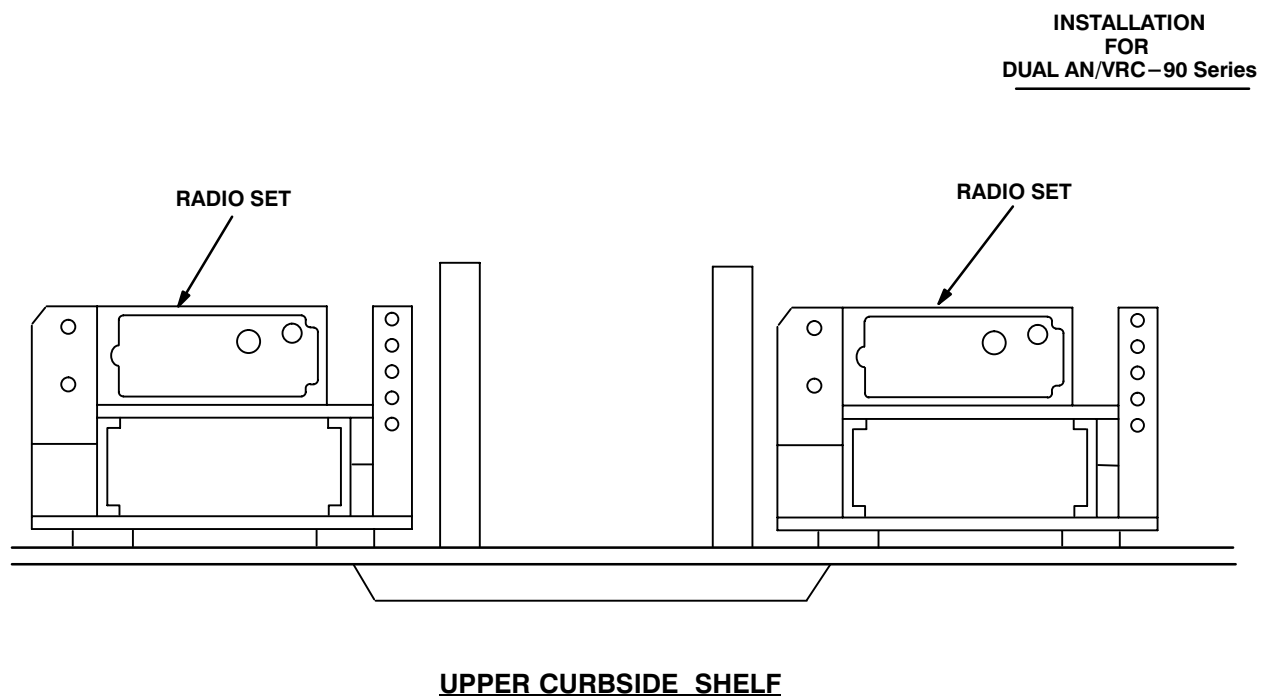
(2). MK and Radio Installation: Radio Equipment Locations
